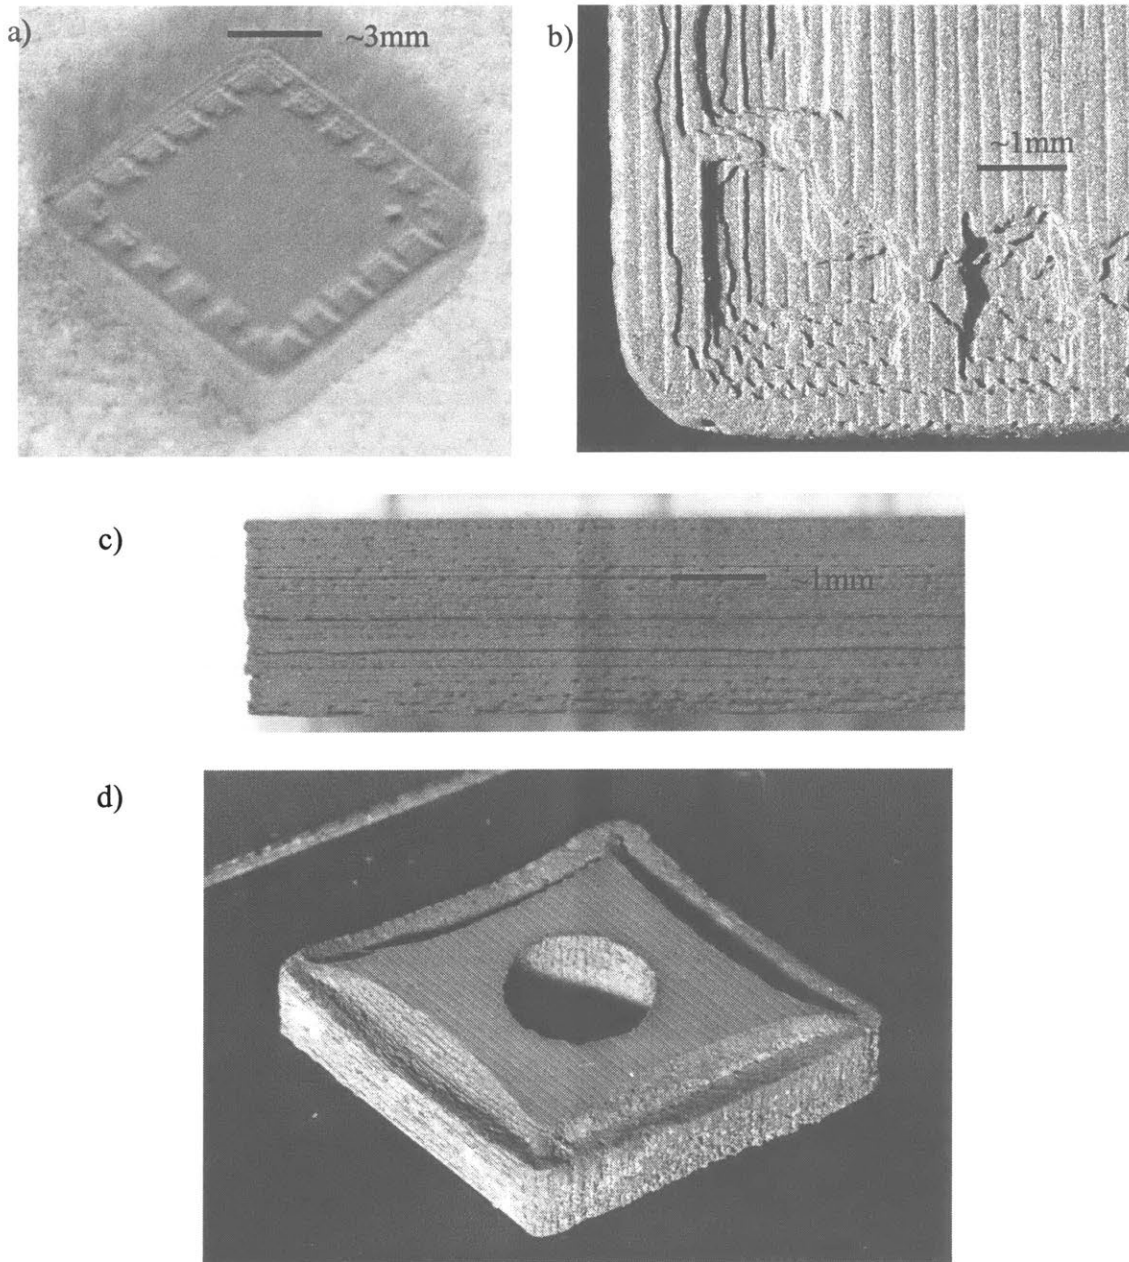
First cutting tool insert printed on Alpha machine using CJ printing of PAA binder a), top view of corner b), sidewall view of a bar geometry printed with the insert geometries c) and second insert geometry printed on the Alpha machine d).
